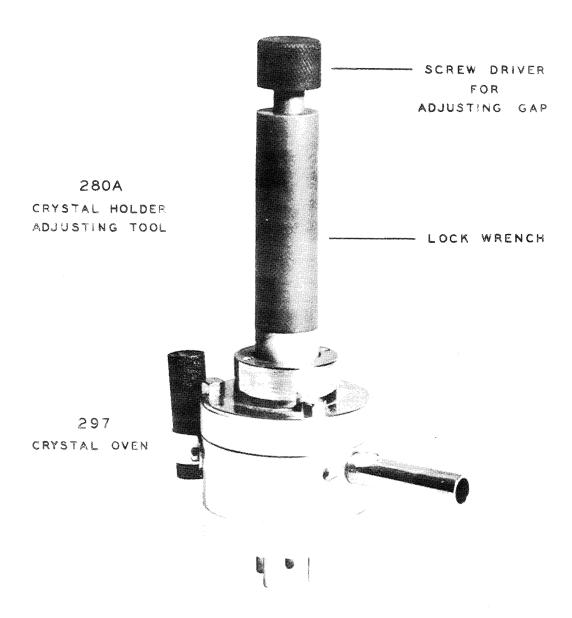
Type 280A Crystal Holder Adjusting Tool
